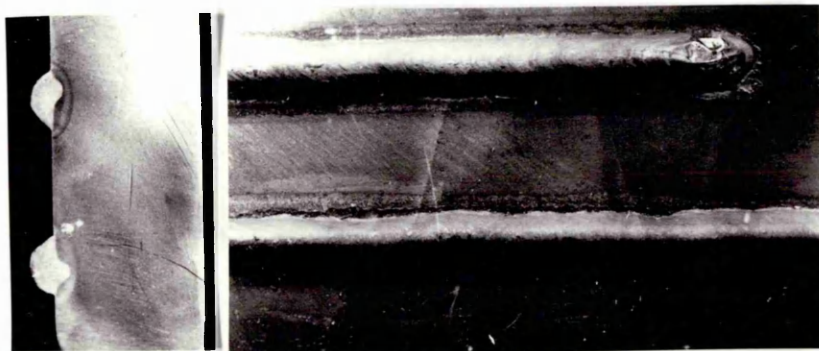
Bead on plate deposit in horizontal-vertical position welding, controlled drop spray MIG. 1.2mm mild steel wire, welding speed 200mm/min. Ar + 5% CO₂.
